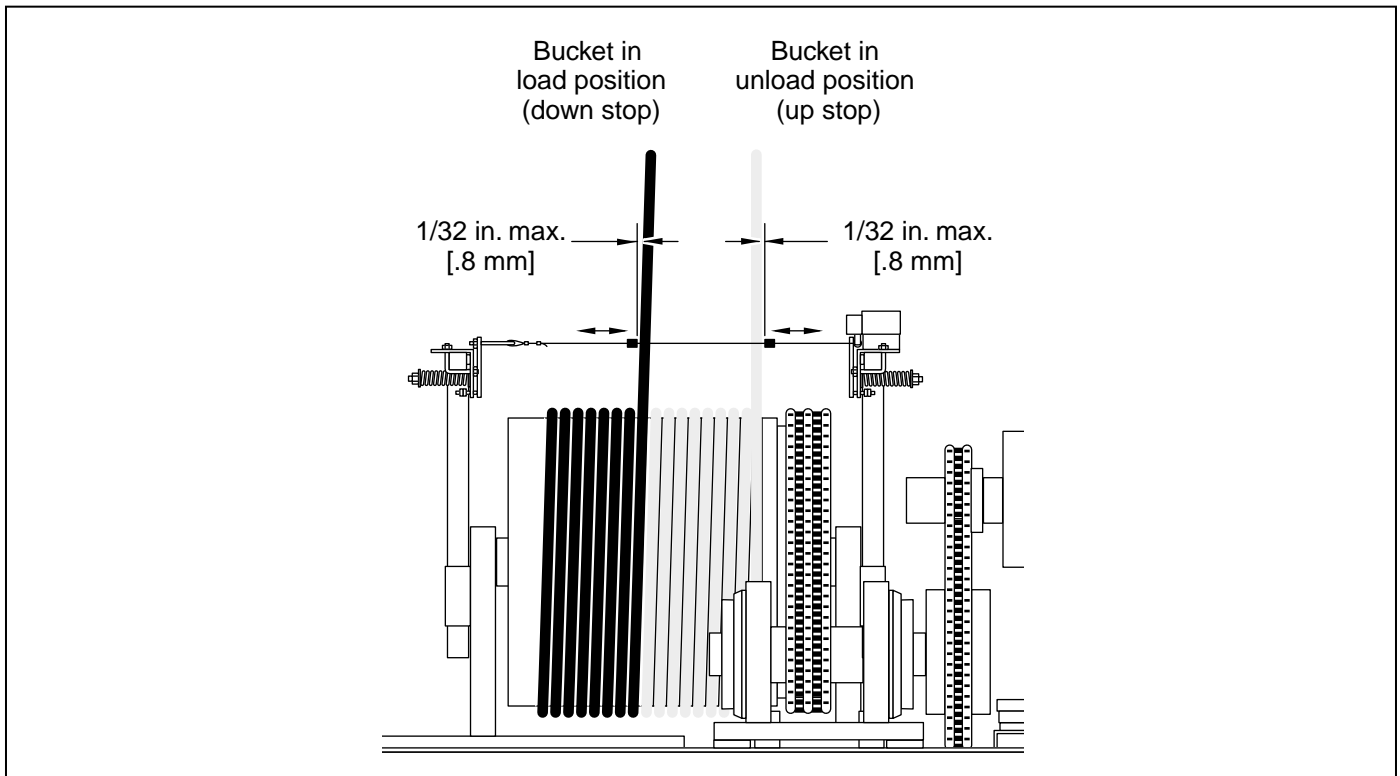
Trip Cable Clamp Locations – Cable Switch
